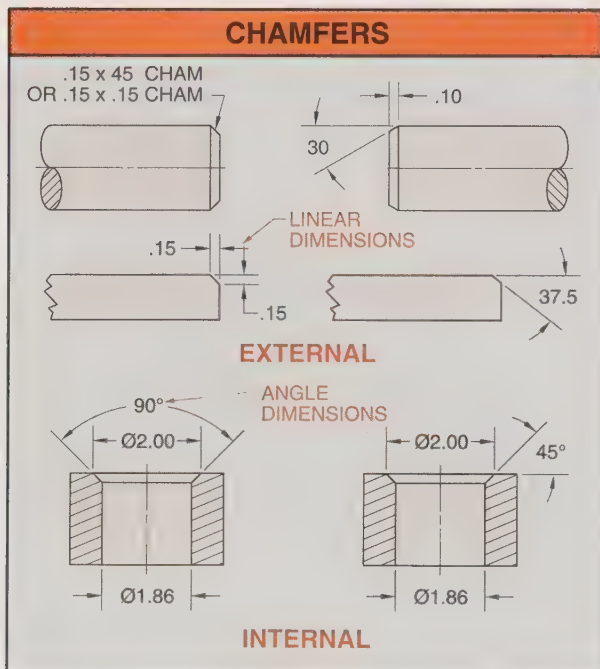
Chamfers are specified with angle and linear dimensions.
